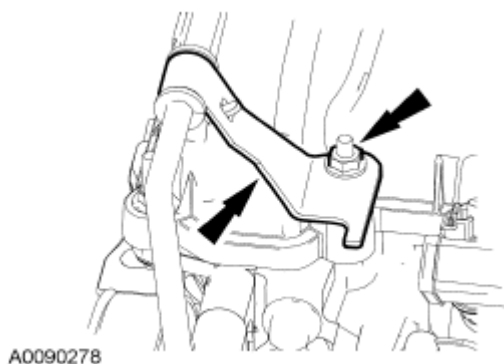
Locating Power Steering Tube, Bracket & Nut
